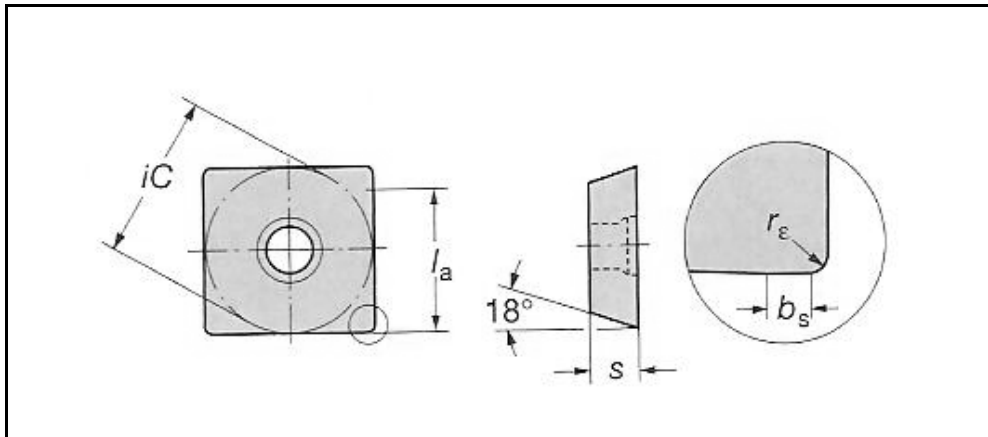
Geometry of TiAlN Coated Carbide tool insert (Sandvik 1030)
